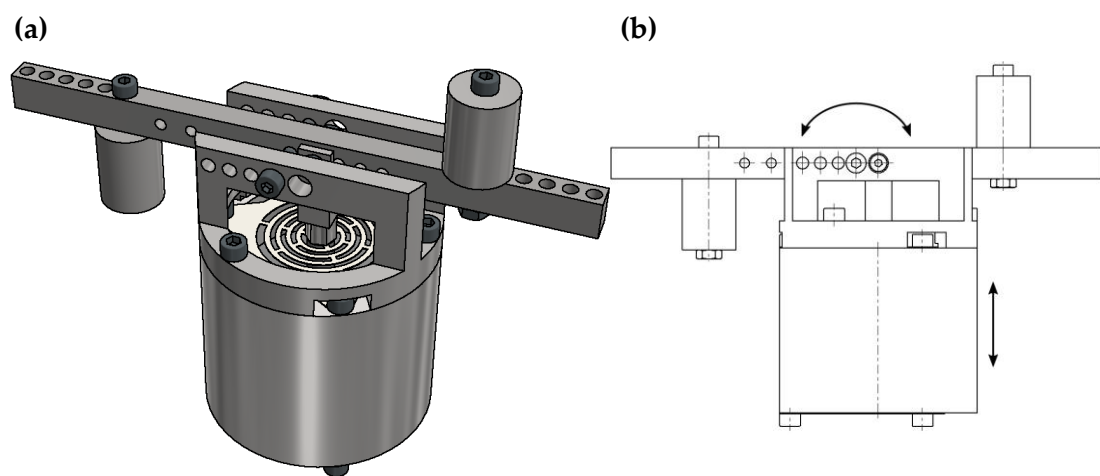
Design view of the hinged configuration of the flywheel prototype. Rendered view (a) and schematic view (b).
